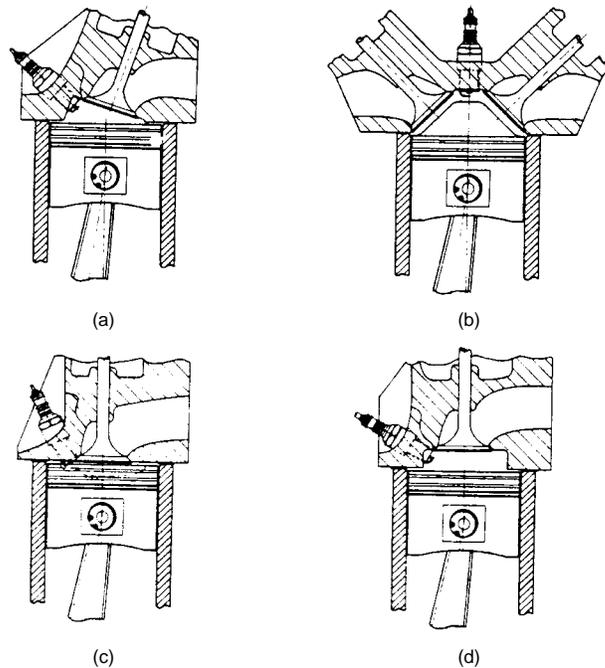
Classical combustion chambers for spark-ignition engines; (a) Wedge; (b) hemispherical head; (c) bowl in piston; (d) bathtub head. (Courtesy: R. Stone, SAE, 1995.)
